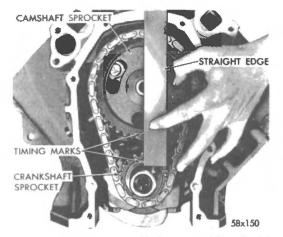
Inspecting Alignment of Timing Marks Using a Straightedge (Typical)
